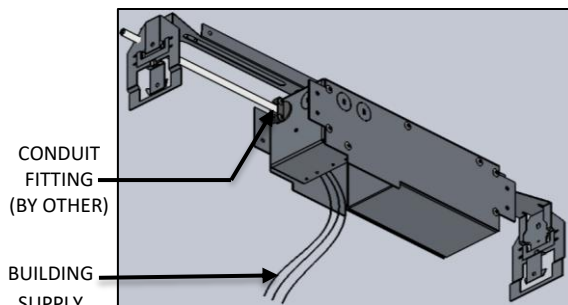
CONDUIT FITTING TO J-BOX ASSEMBLY
